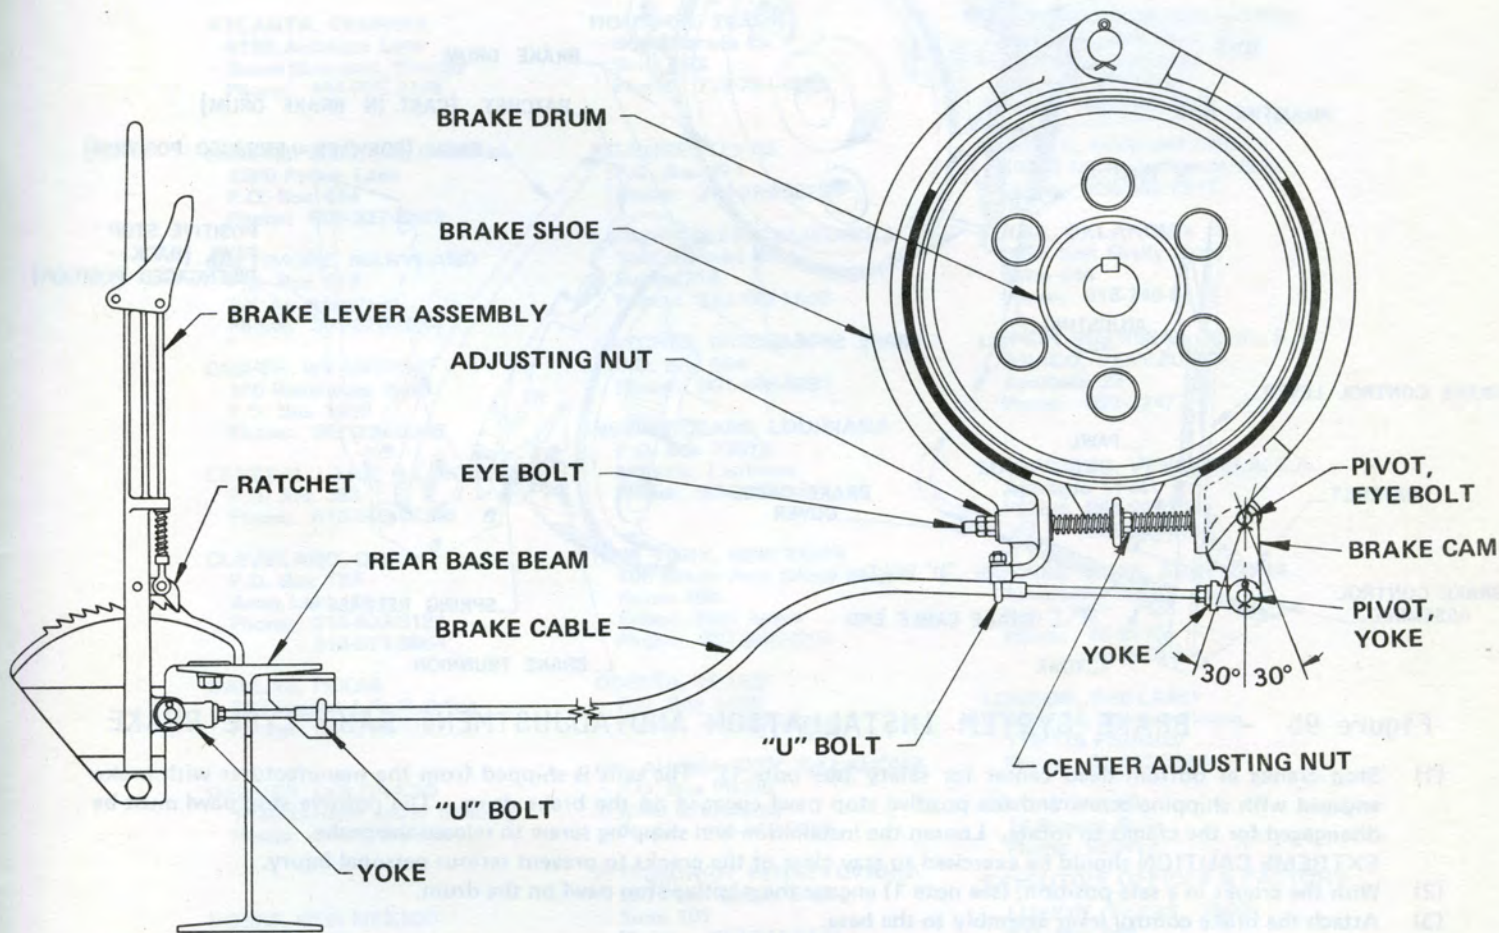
BRAKE SYSTEM INSTALLATION AND ADJUSTMENT-SHOE TYPE BRAKE
